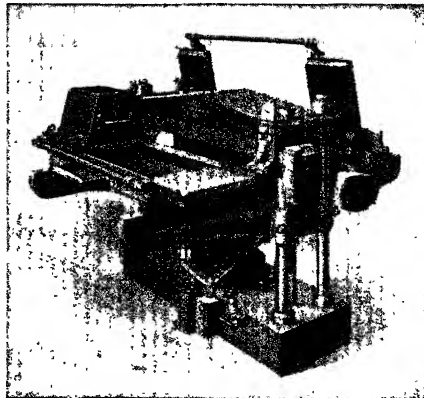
BUCKEYE DOUBLE STEAM CAKE FORMER.
